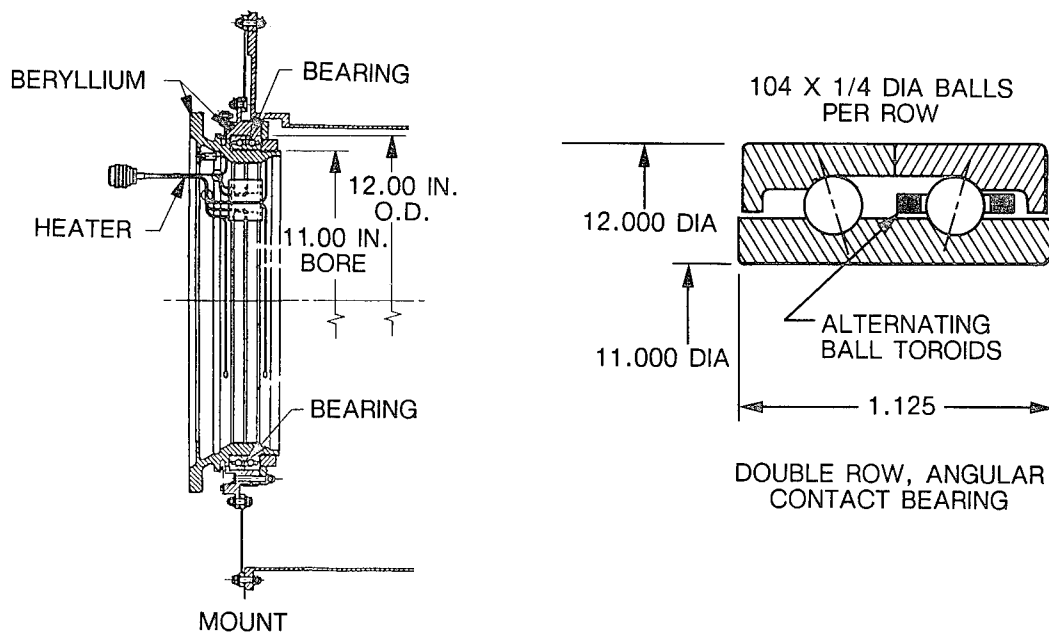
Geometry of LGA Bearing and Mounting to Beryllium Structure
